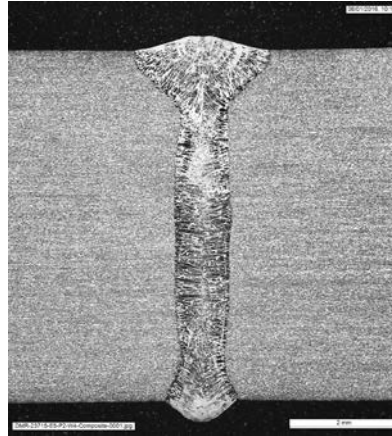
Weld made at -2 focus at 4.5 kW with 1.5 m/min welding speed.
